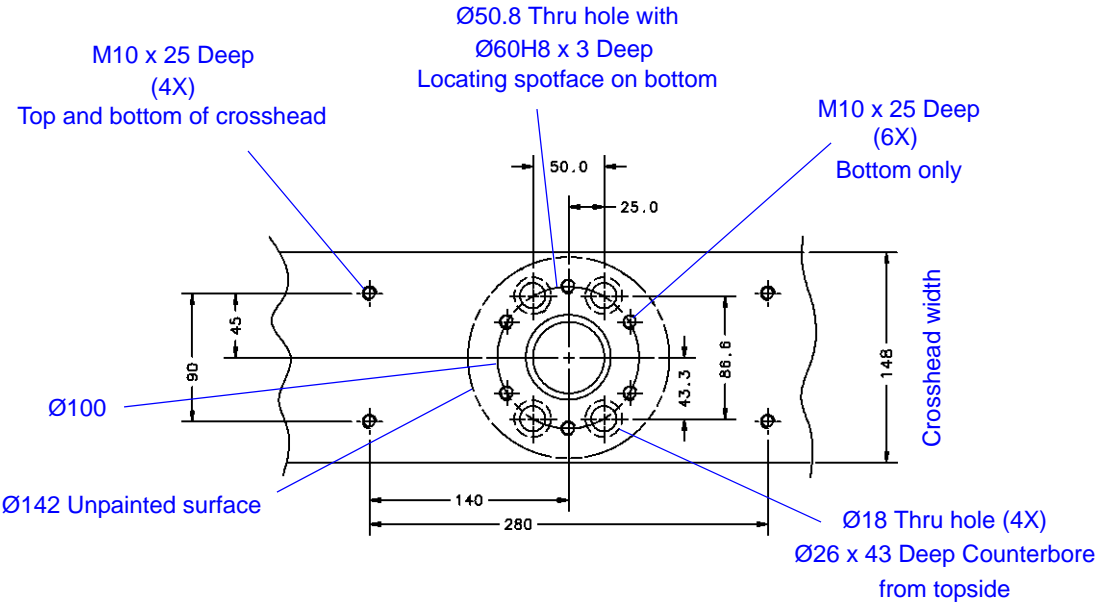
Series 5584 and 5585H Moving Crosshead Mounting Dimensions
